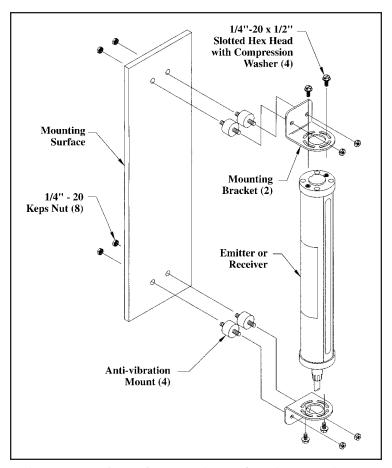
MACHINE-GUARD emitter and receiver mounting hardware
